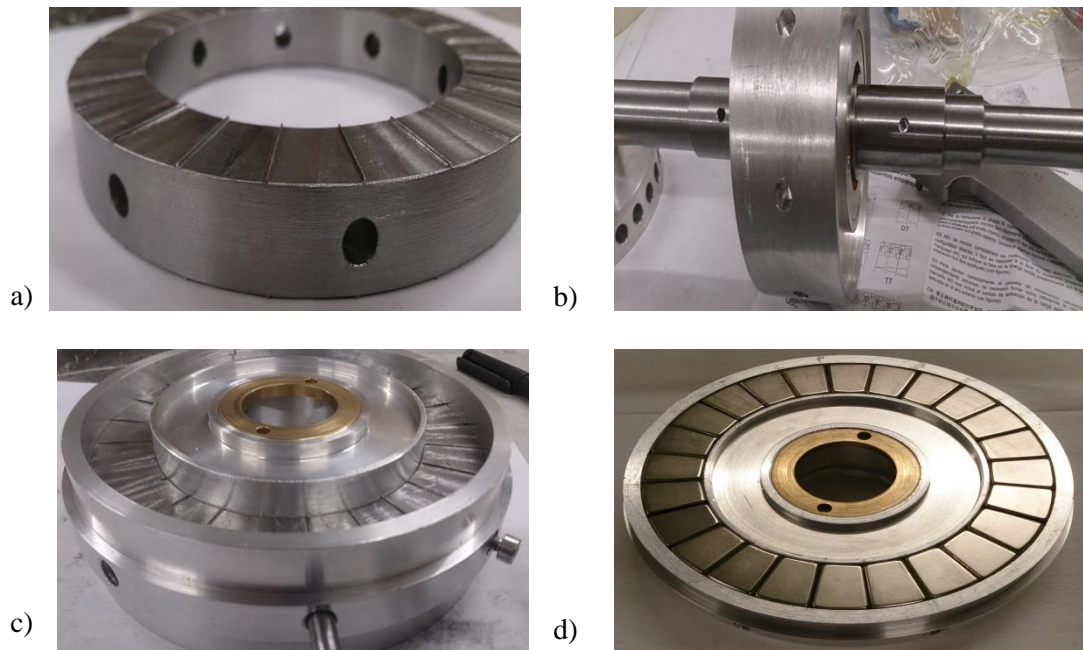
HSR a) Back iron b) Hub on shaft c) Pre-magnet bonding d) Completed HSR
